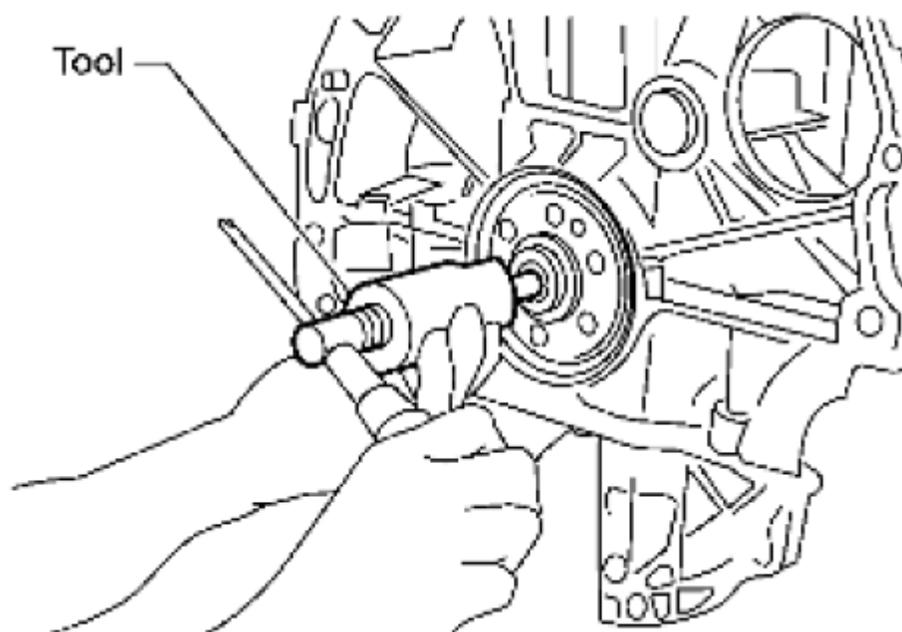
Removing Pilot Converter Or Pilot Bushing Using Tool
